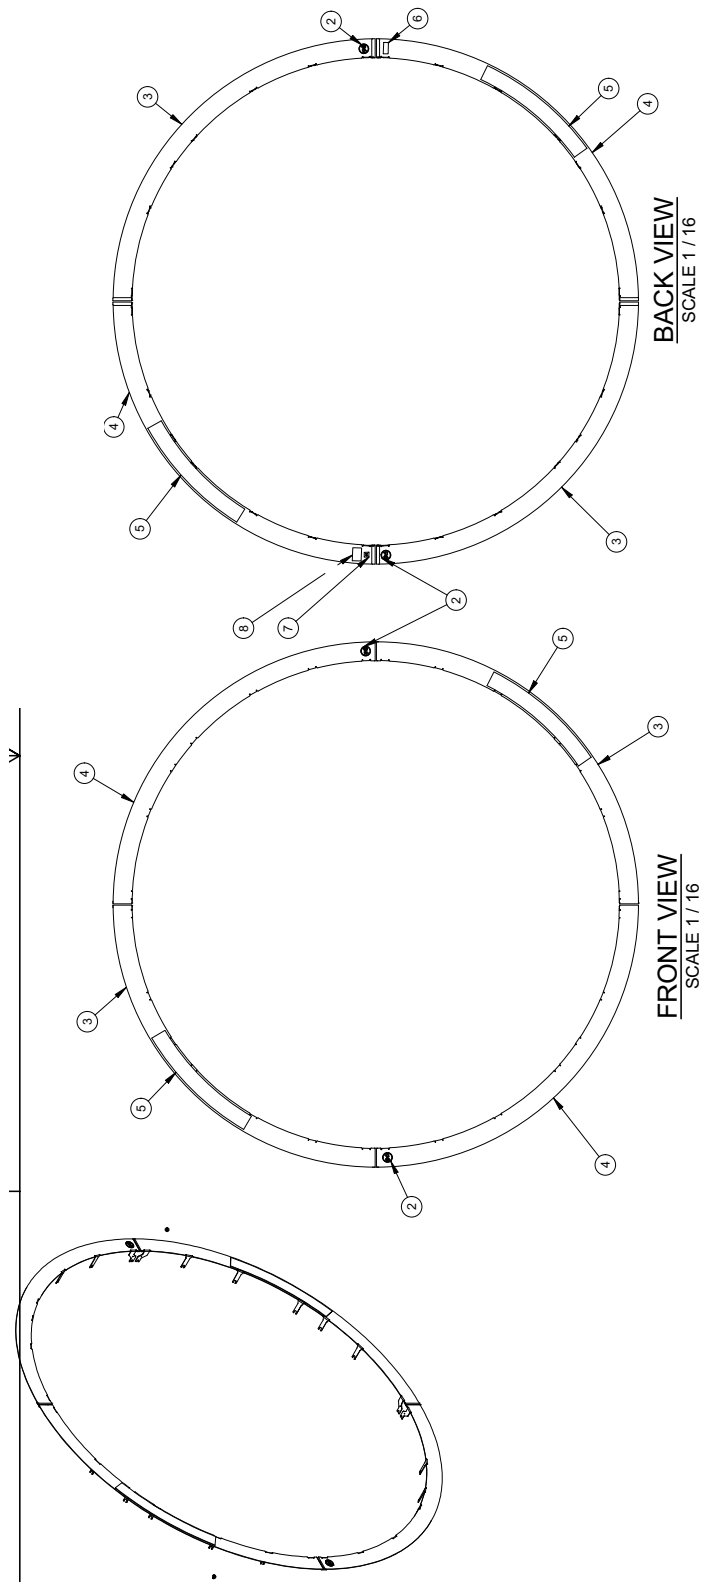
7" (178 MM) PNEUMATIC TRIPPER ASSEMBLY AFC (P/N 5001177)
